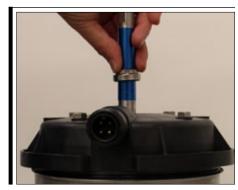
| When installing the rotary seal, wrap Mylar film around motor shaft covering the area around the retaining ring groove to avoid damaging seal.
